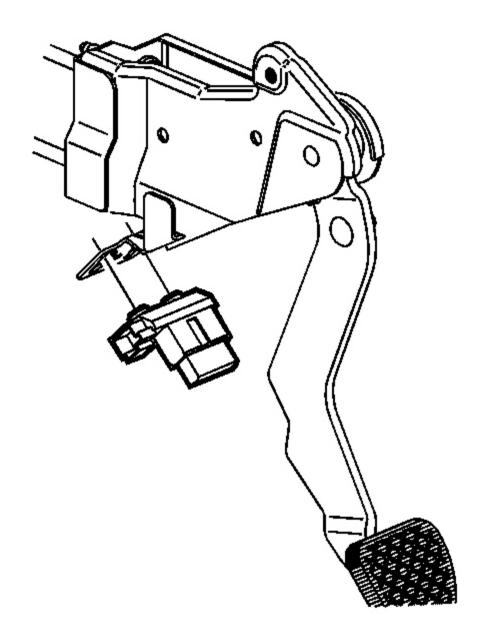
Clutch Pedal Position Switch & Clutch Pedal Courtesy of GENERAL MOTORS CORP.
